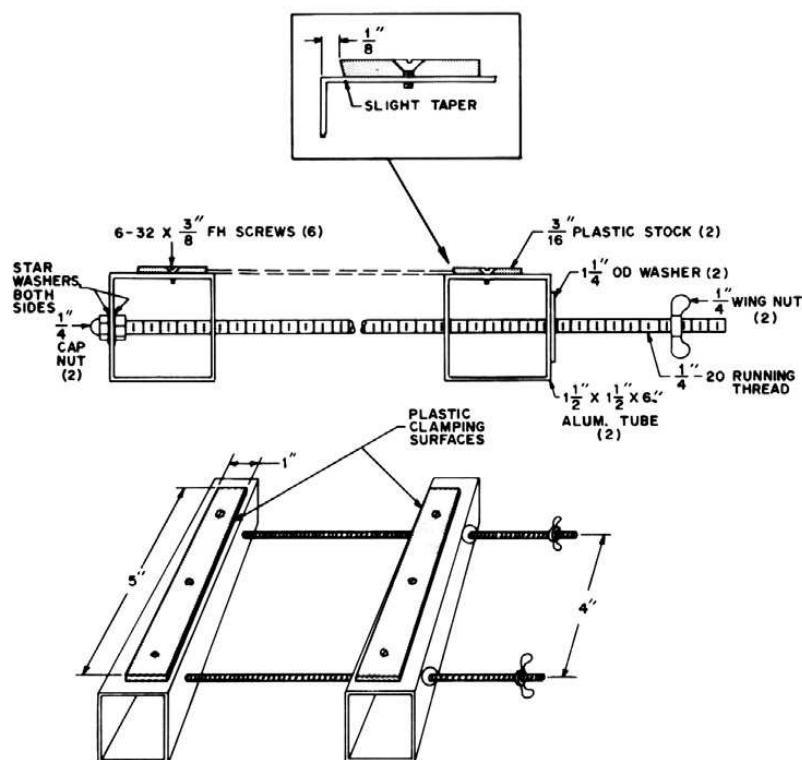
Printed-circuit-board rig. Wooden blocks can be used instead of aluminum tubing.
